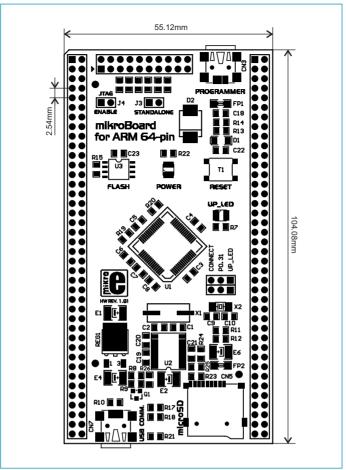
Dimensions of the mikroBoard for ARM 64-pin
